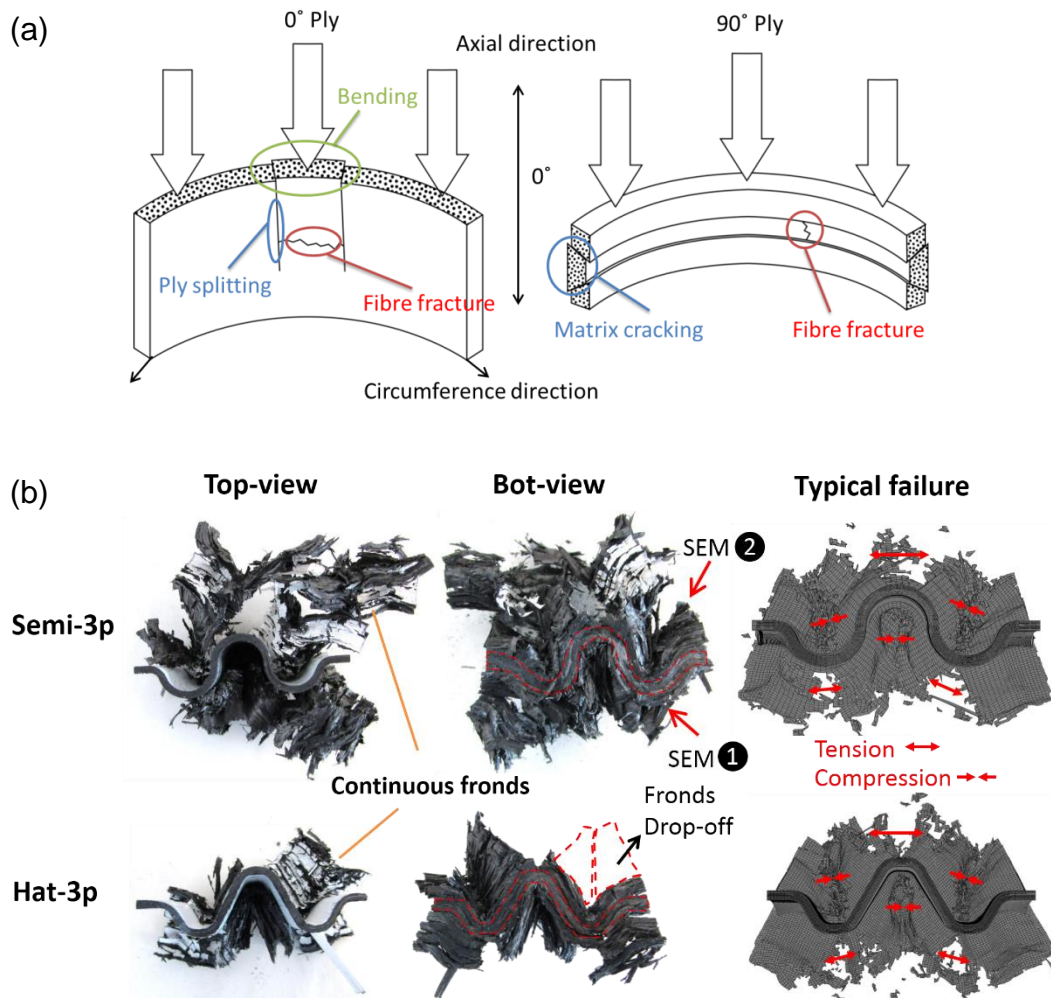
Circumferential direction: Typical damage mechanisms (a) damage mechanisms in 0° and 90° plies (b) typical failure morphologies of tested specimens.
